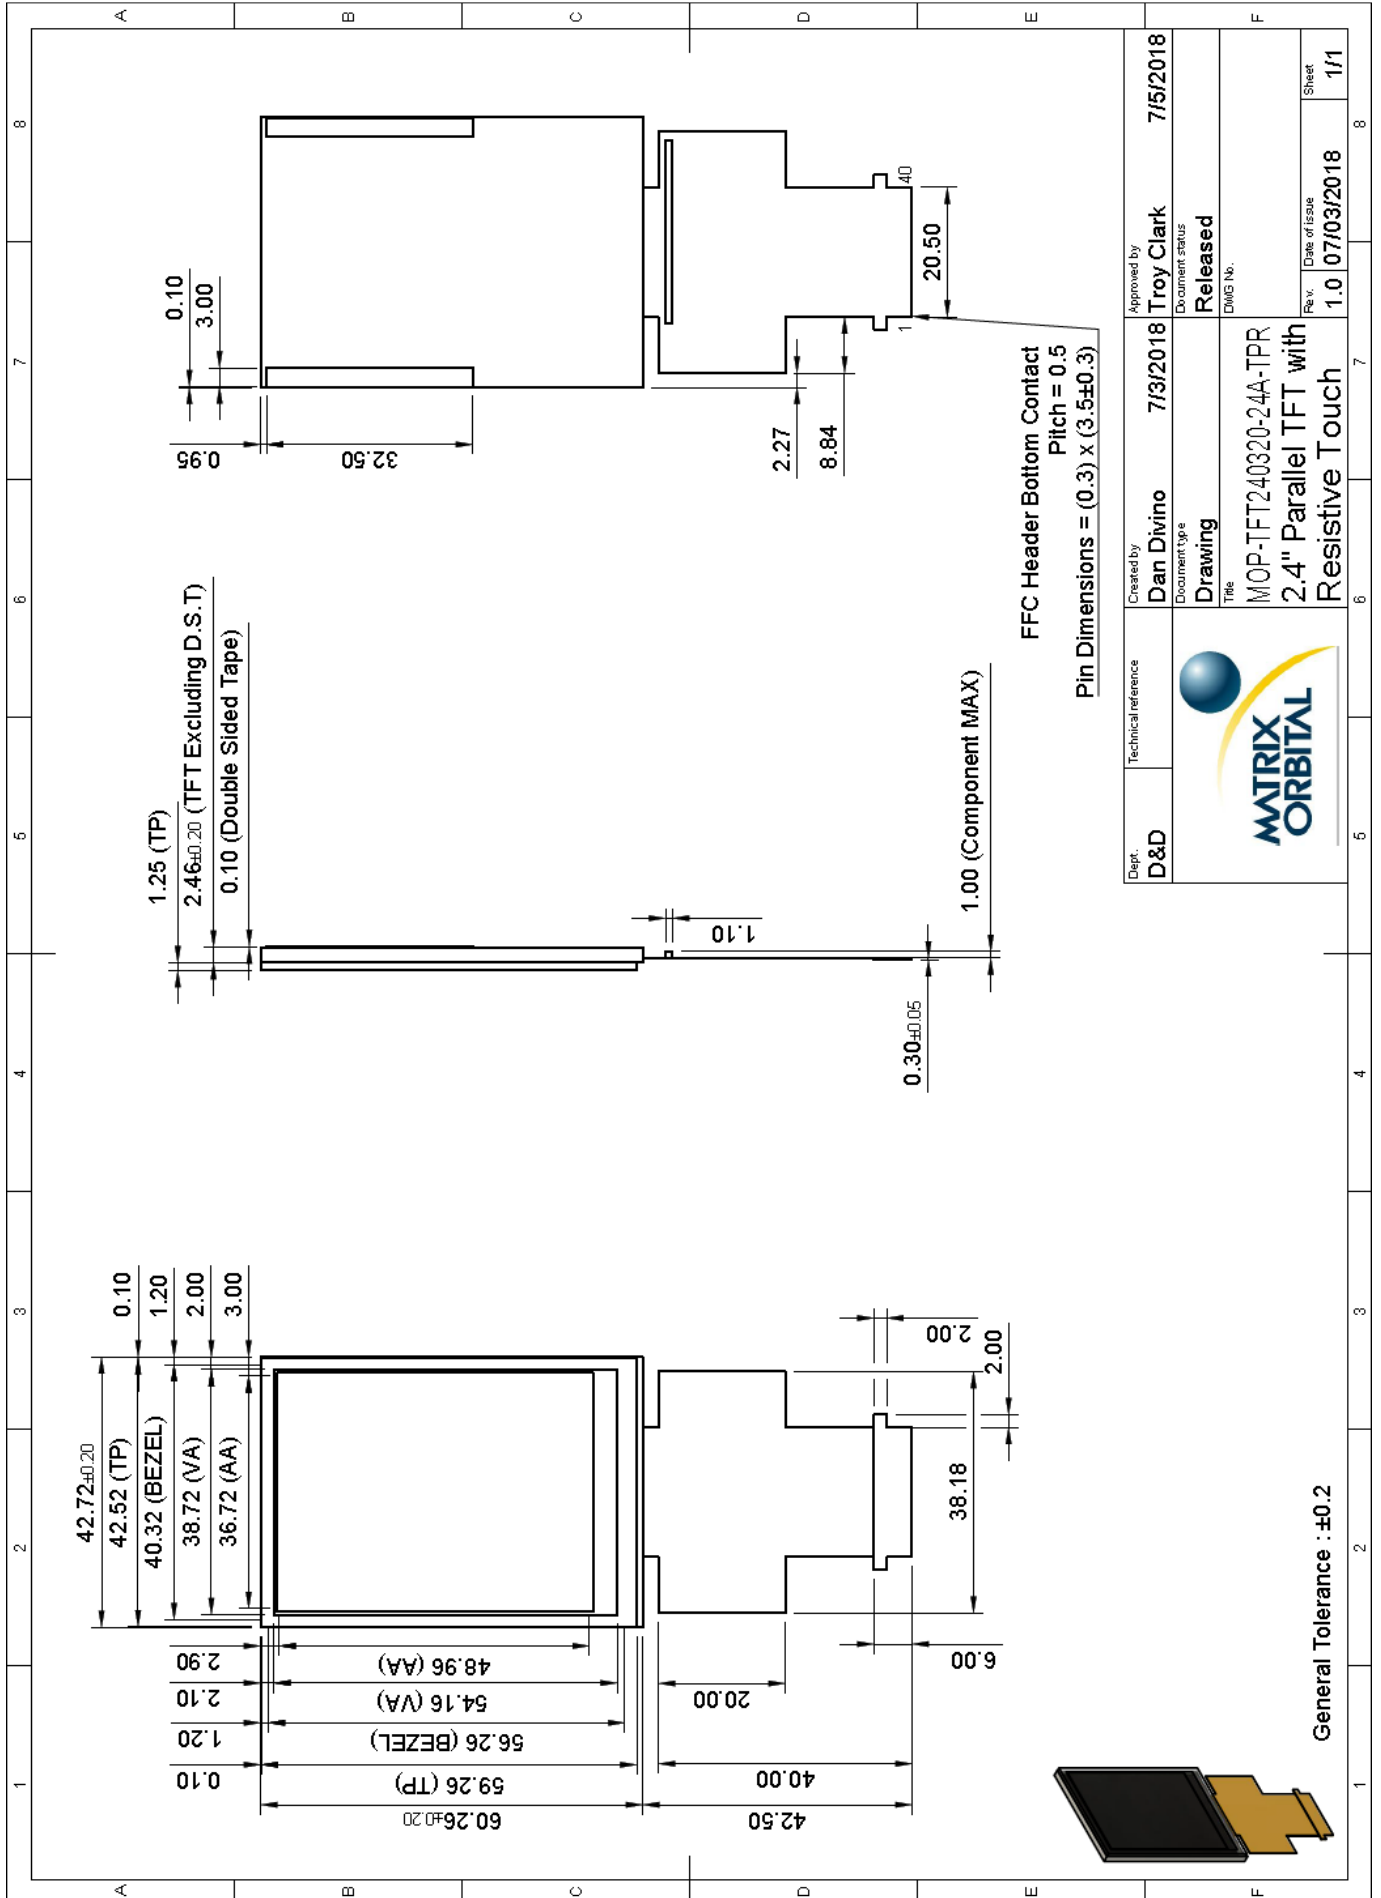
MOP-TFT240320-24A-BLM-TPR Drawing
